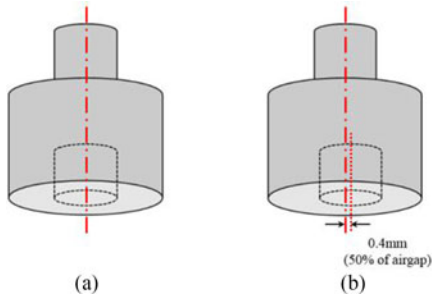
(a) Concentric shaft housing and (b) 50% eccentric shaft housing.
